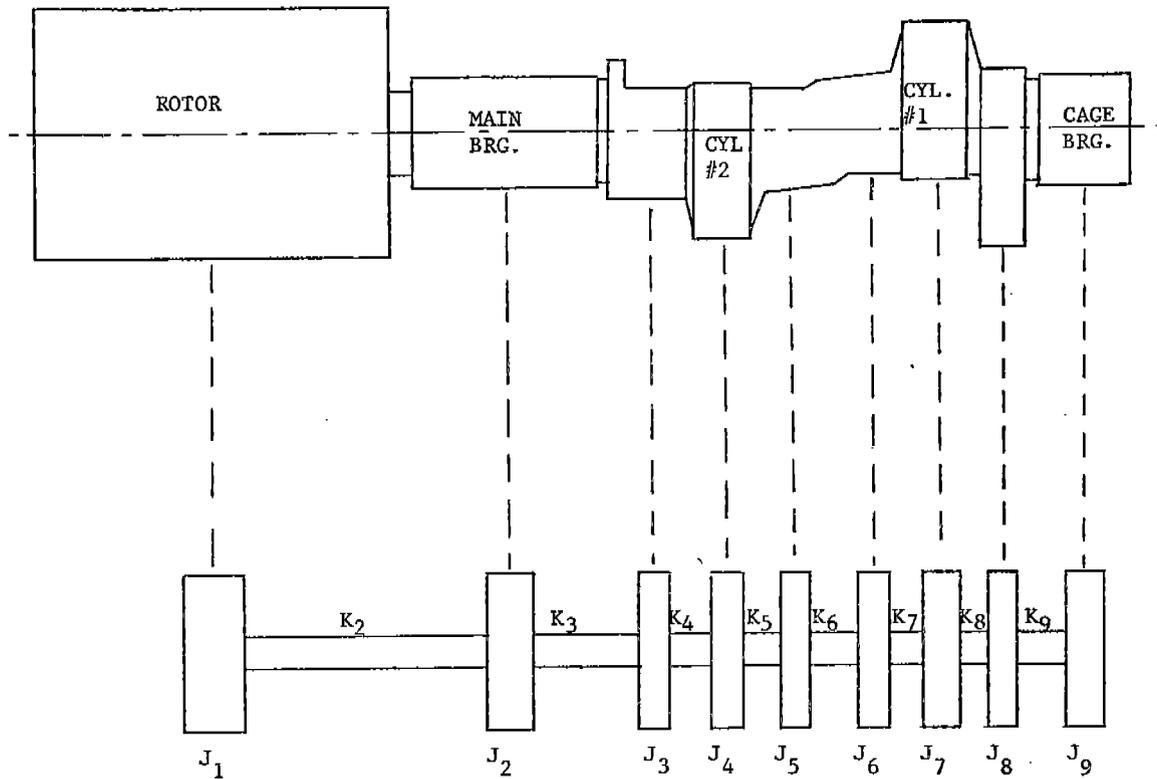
Hermetic Compressor Crankshaft for Example 2
